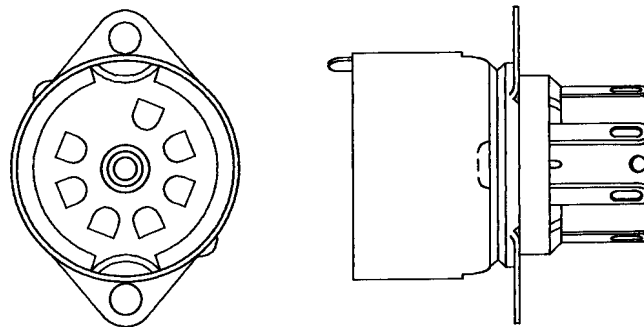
KS-13225, L1, L2, or L3, Socket
